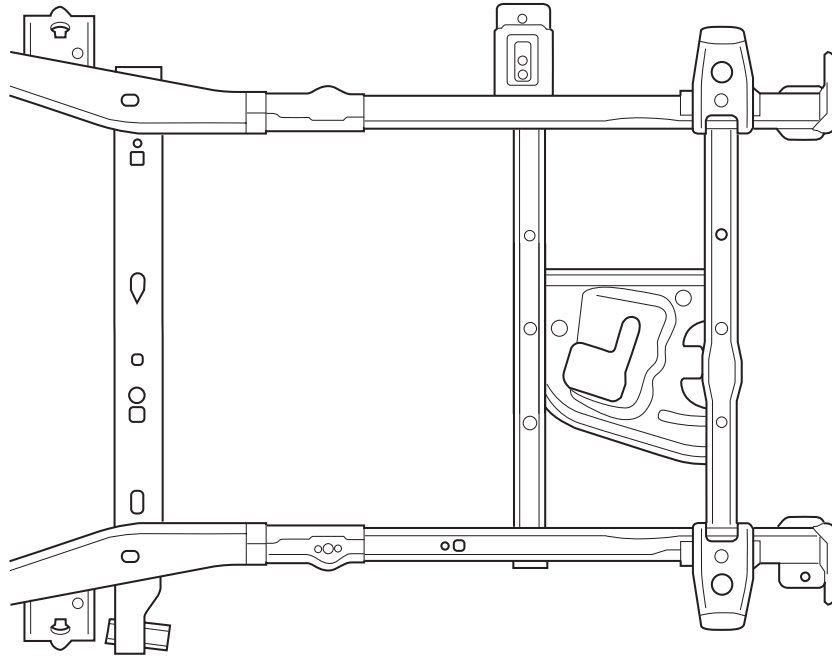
REAR FRAME – BOTTOM VIEW (5.5' BOX MODEL SHOWN)
